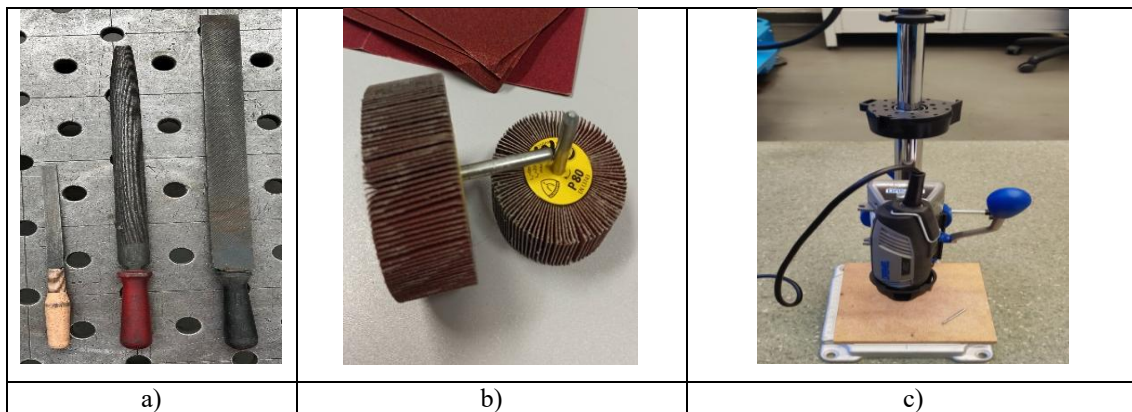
Examples of production means for carrying out the third – final stage: a) metal files, b) paper grinding wheels, c) hand milling machine
